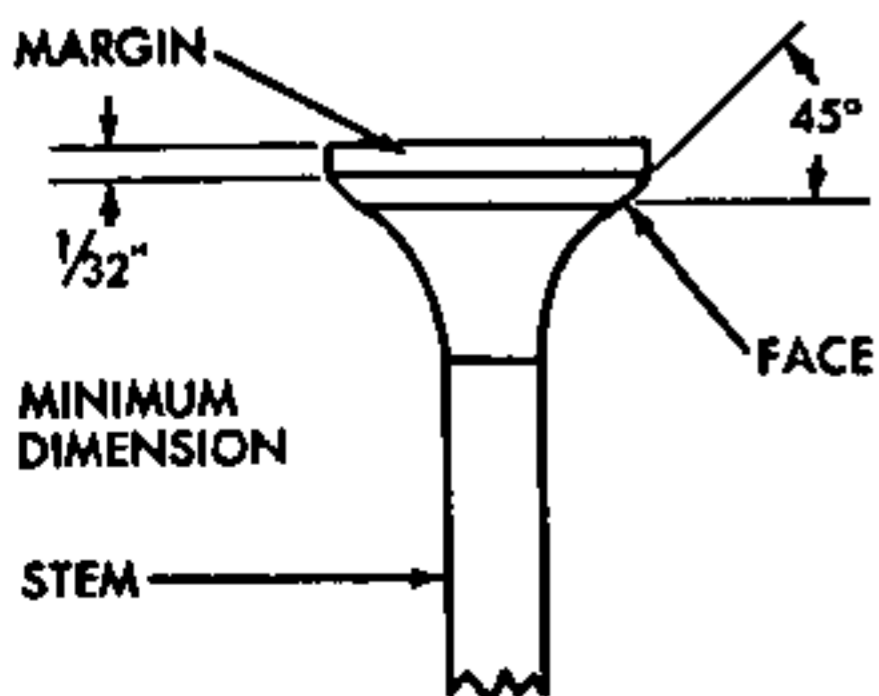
Valve face angle should be 45 degrees. Minimum valve head margin is 1/32-inch (0.8 mm).
